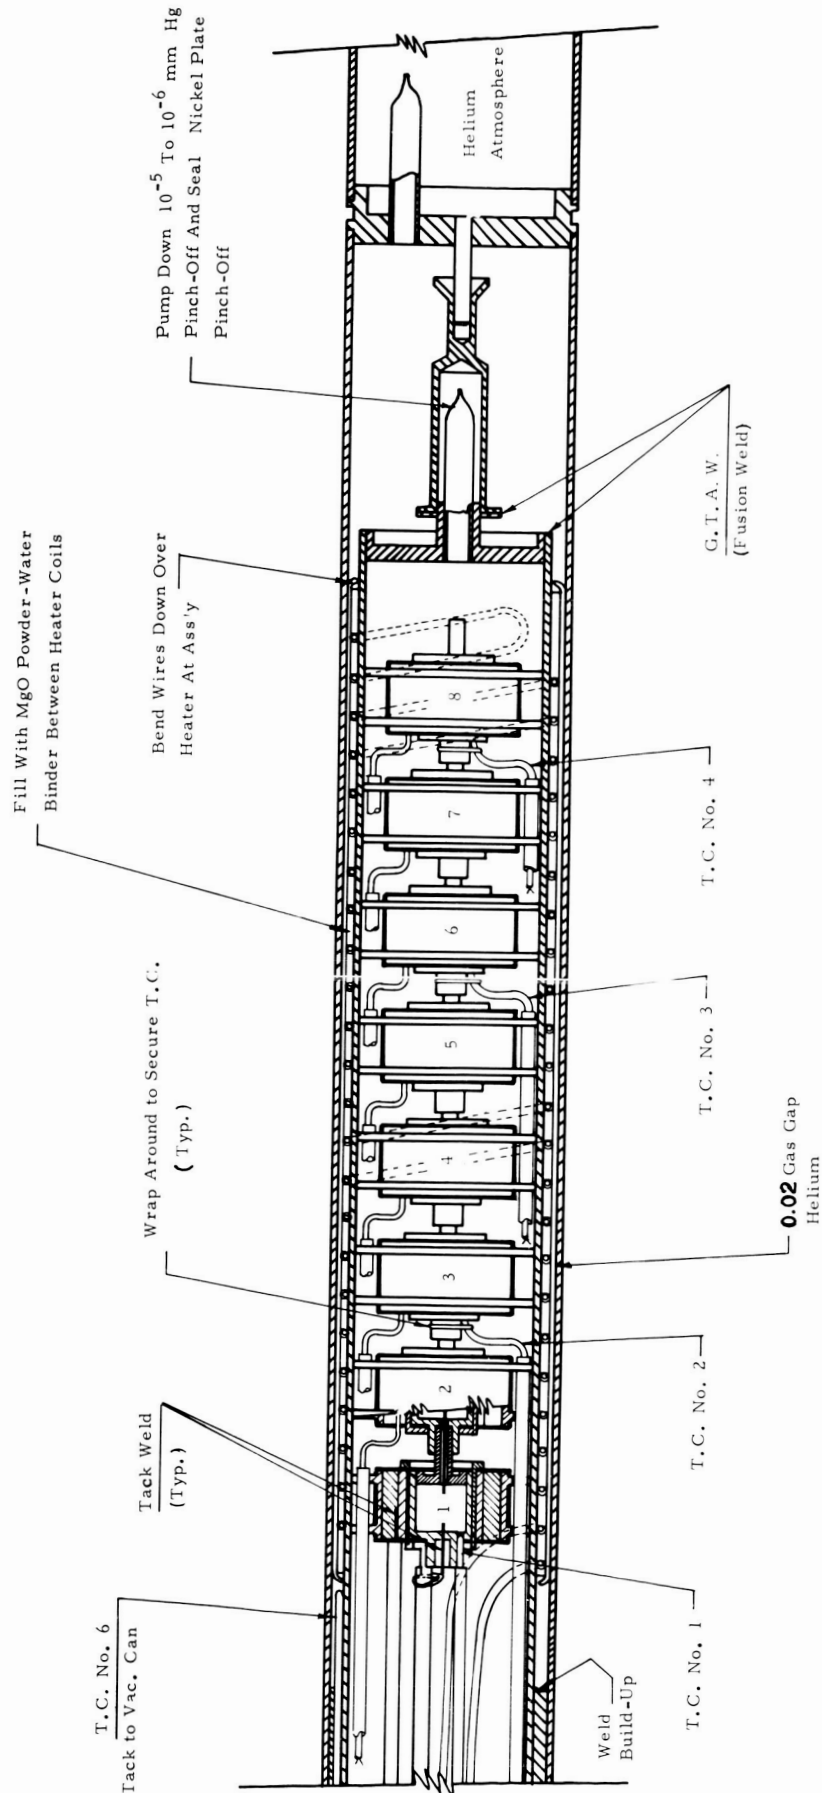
CAPSULE ASSEMBLY FOR LUCALOX SAMPLE IRRADIATION
